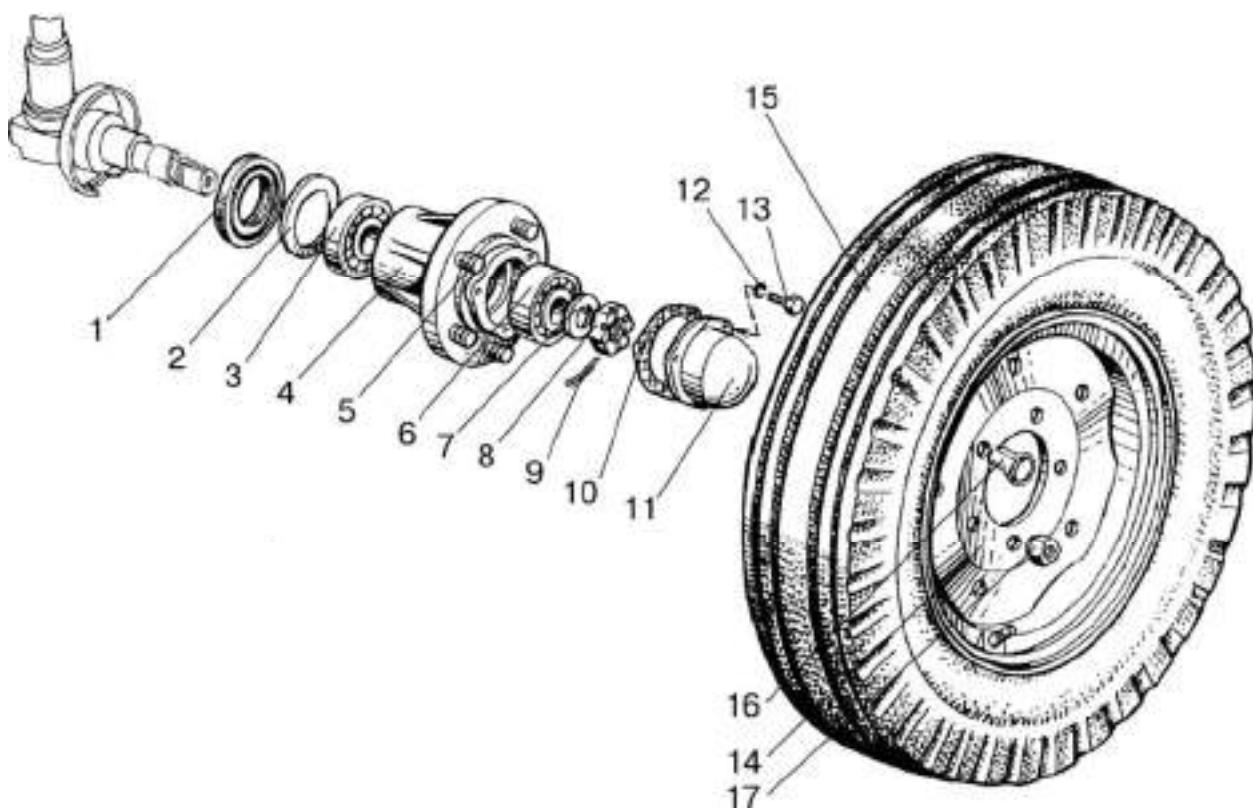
Front guide wheels. Front wheel hubs. (For tractors with front axle)
